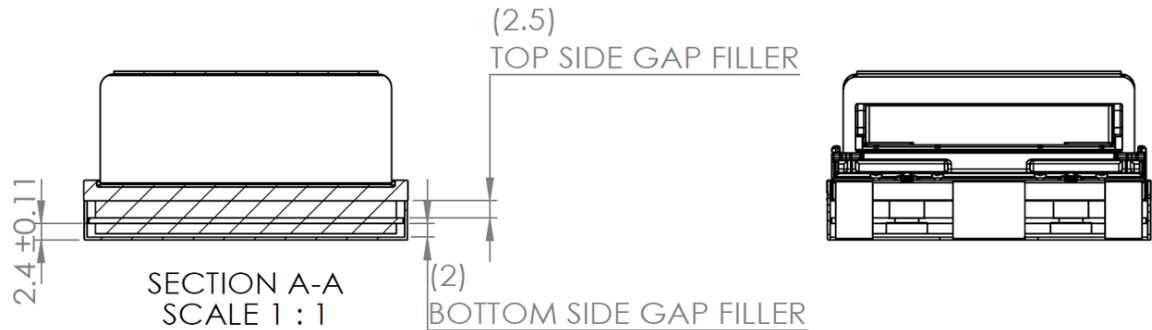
Dual M.2 Integrated Heatsink Dimensions
